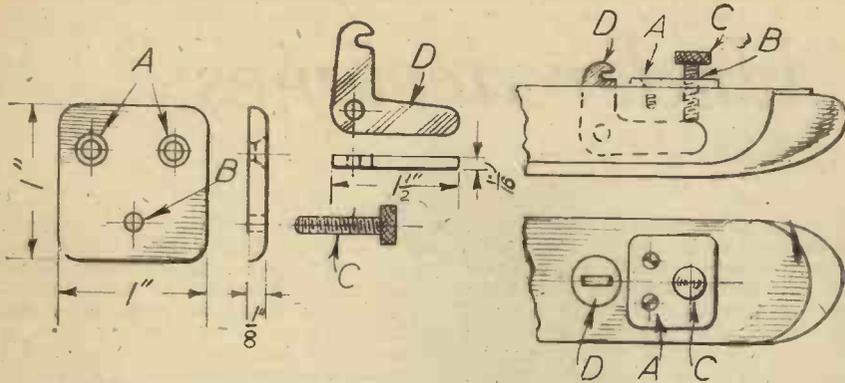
Details of string-adjusting fittings, and how they are assembled on the end of the neck.
